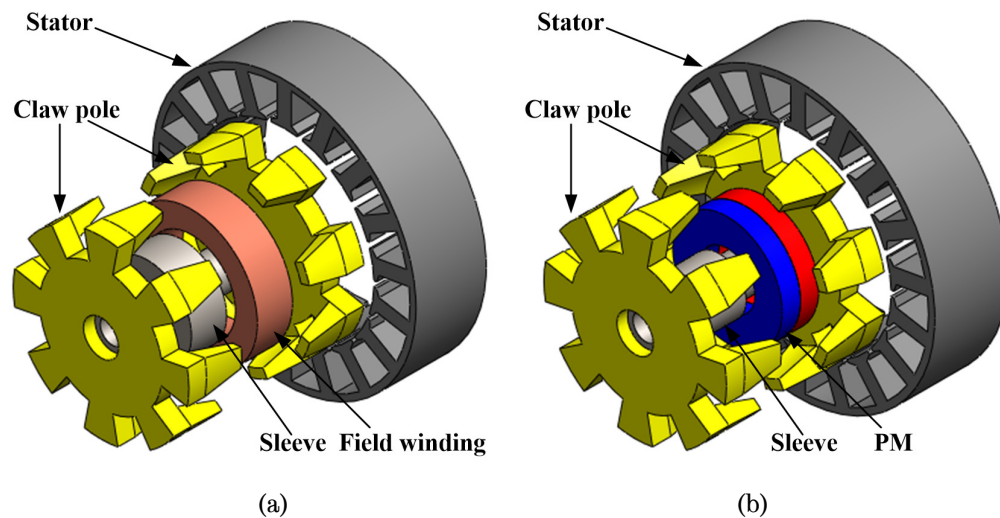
Schematic of claw pole machine. (a). Conventional claw pole machine, (b). PM claw pole machine.
